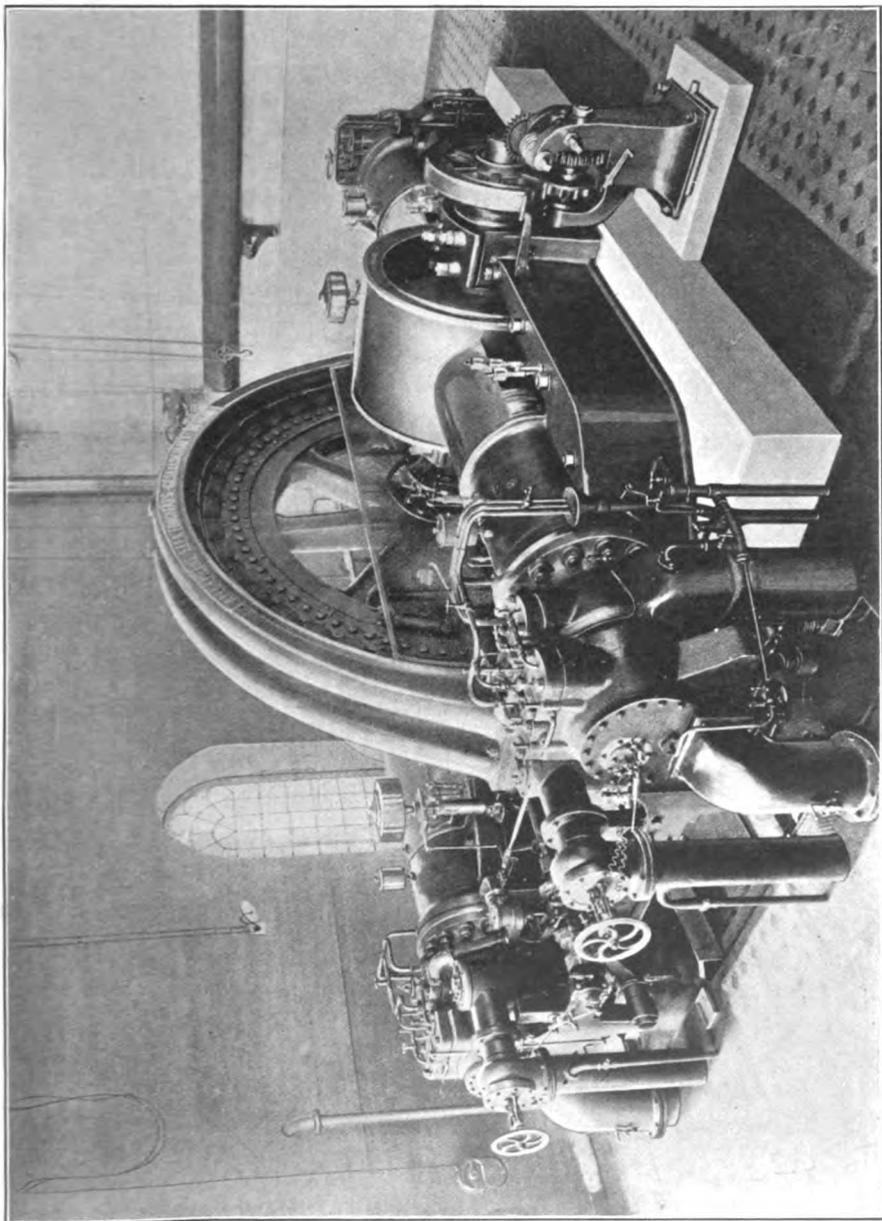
Otto-Deutz, four-cylinder (double-twin), single-acting Engine.
